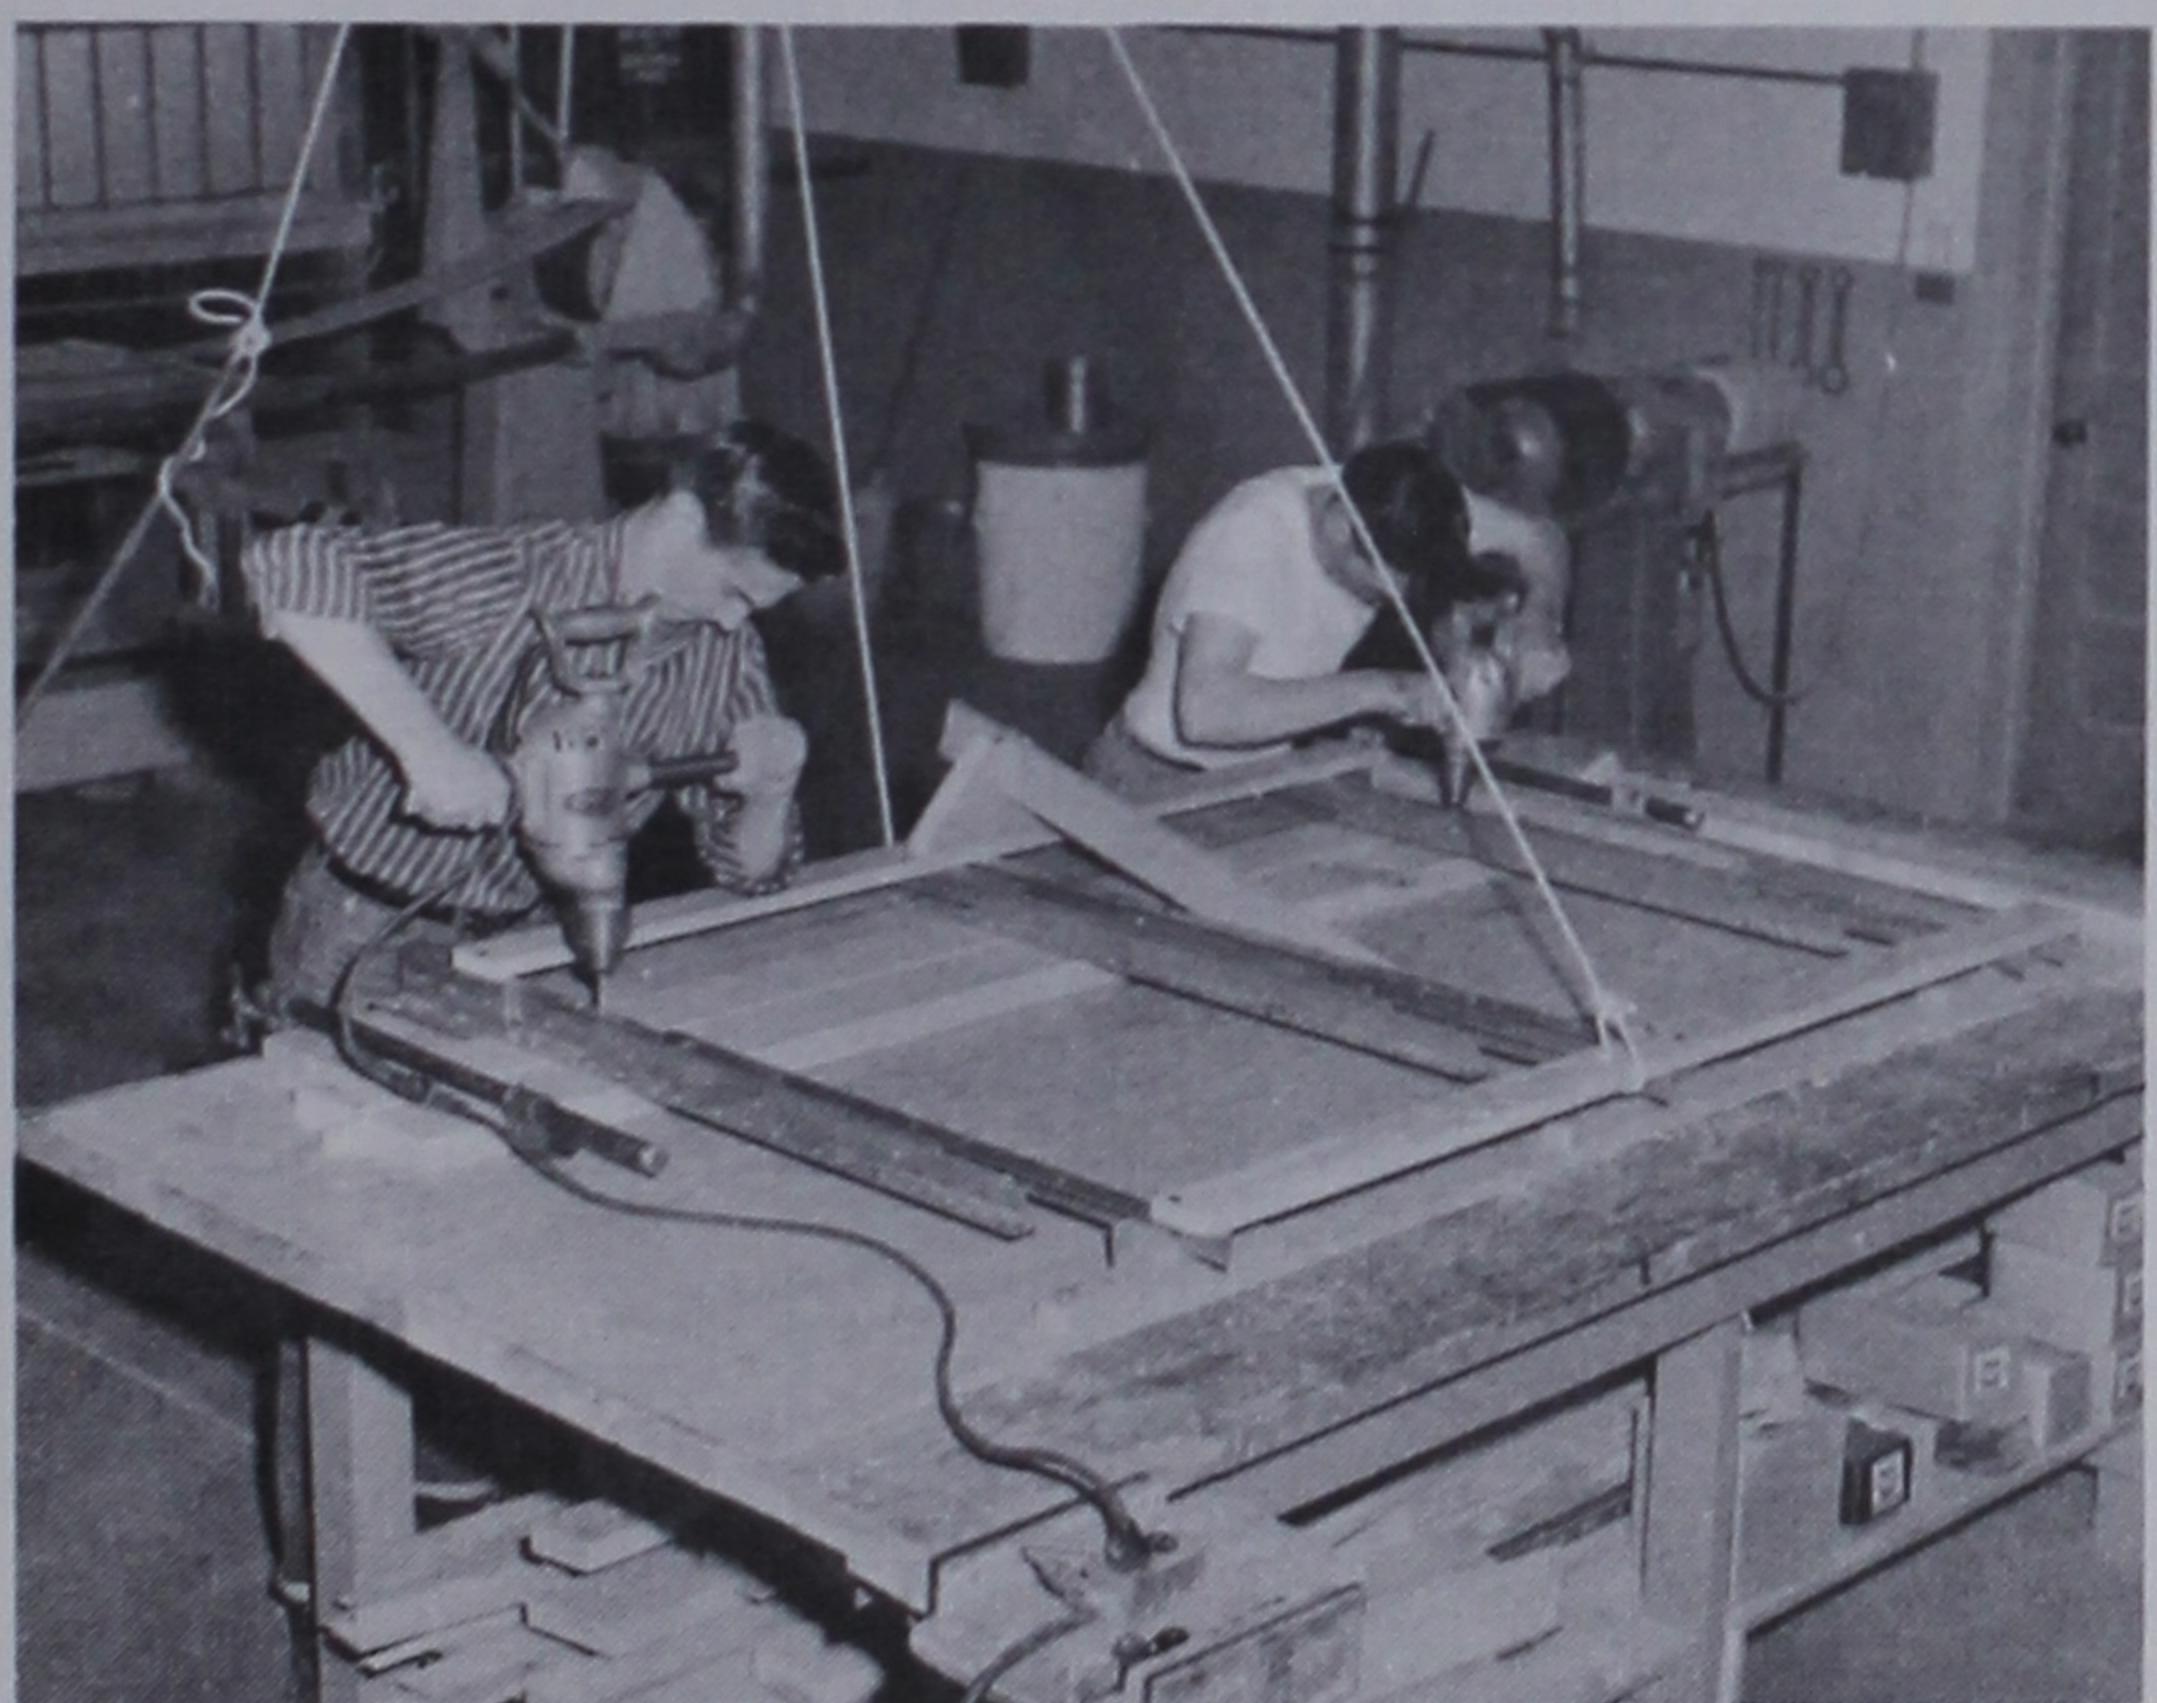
Drilling boltholes in a pair of seat planks using portable tools and a jig for aligning the parts.
